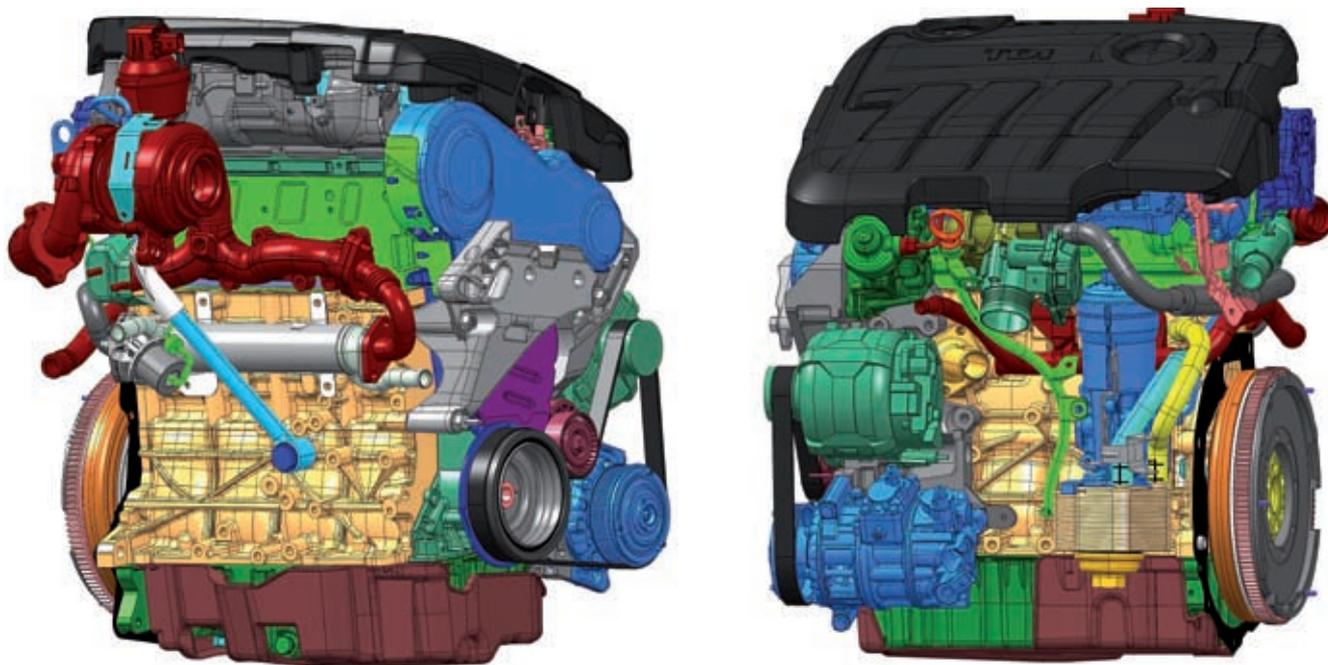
The new 2.0 liter/125 kW TDI with common rail technology, diesel particulate filter and compensation shaft module is the top Diesel engine
